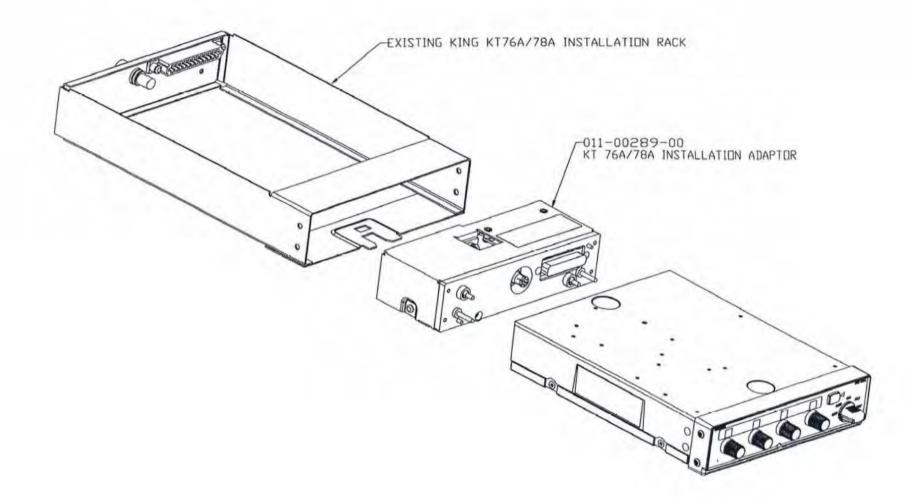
KING KT 76A/78A ADAPTER ASSEMBLY DRAWING
